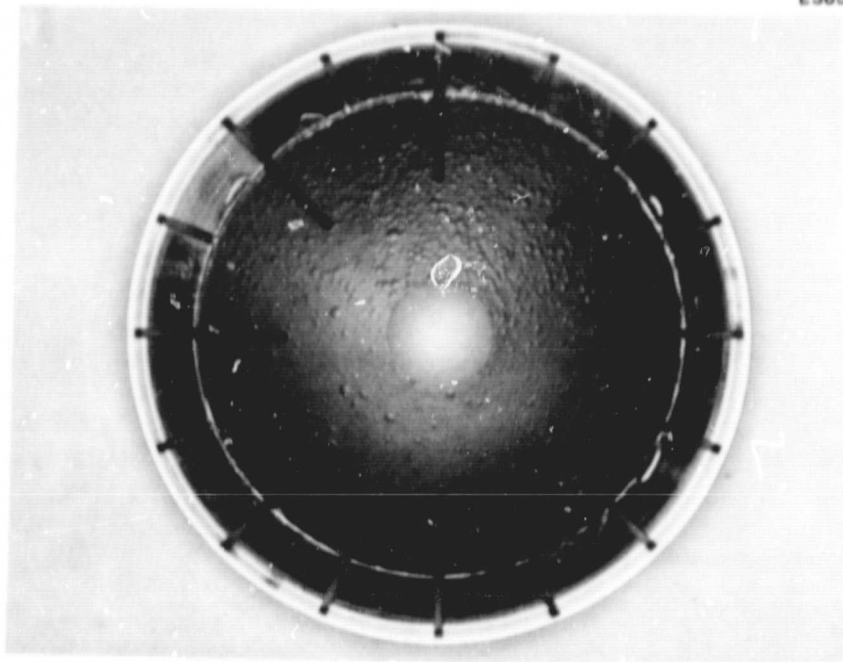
Top view of second brazed subassembly illustrating braze joints between the PG electrode and the 16 copper tabs on the copper support ring. Mag. 1.4X.
